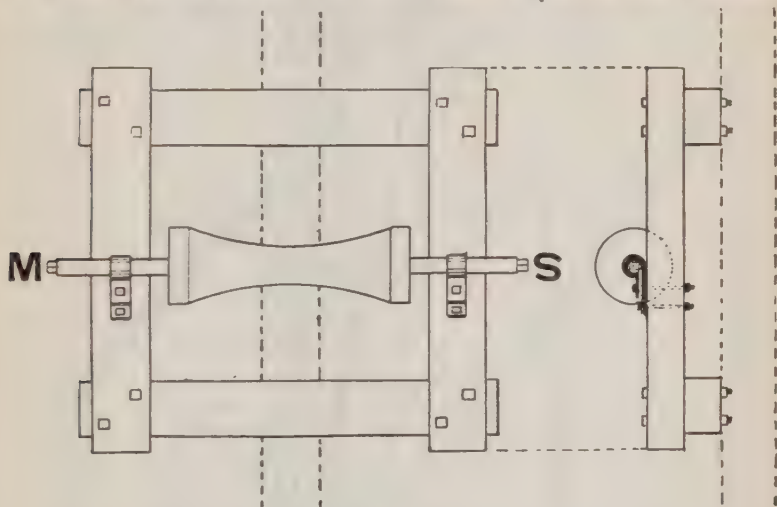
,202 and 2,203.—Winch with combined single and double reduction gear. For light loads the handles are connected to shaft M, giving single reduction through gears LA, and for heavy loads they are connected to shaft S, giving double reduction through gears LARF. The winch is fitted with a brake for controlling speed in lowering, and with a pawl for holding the load at any elevation.
